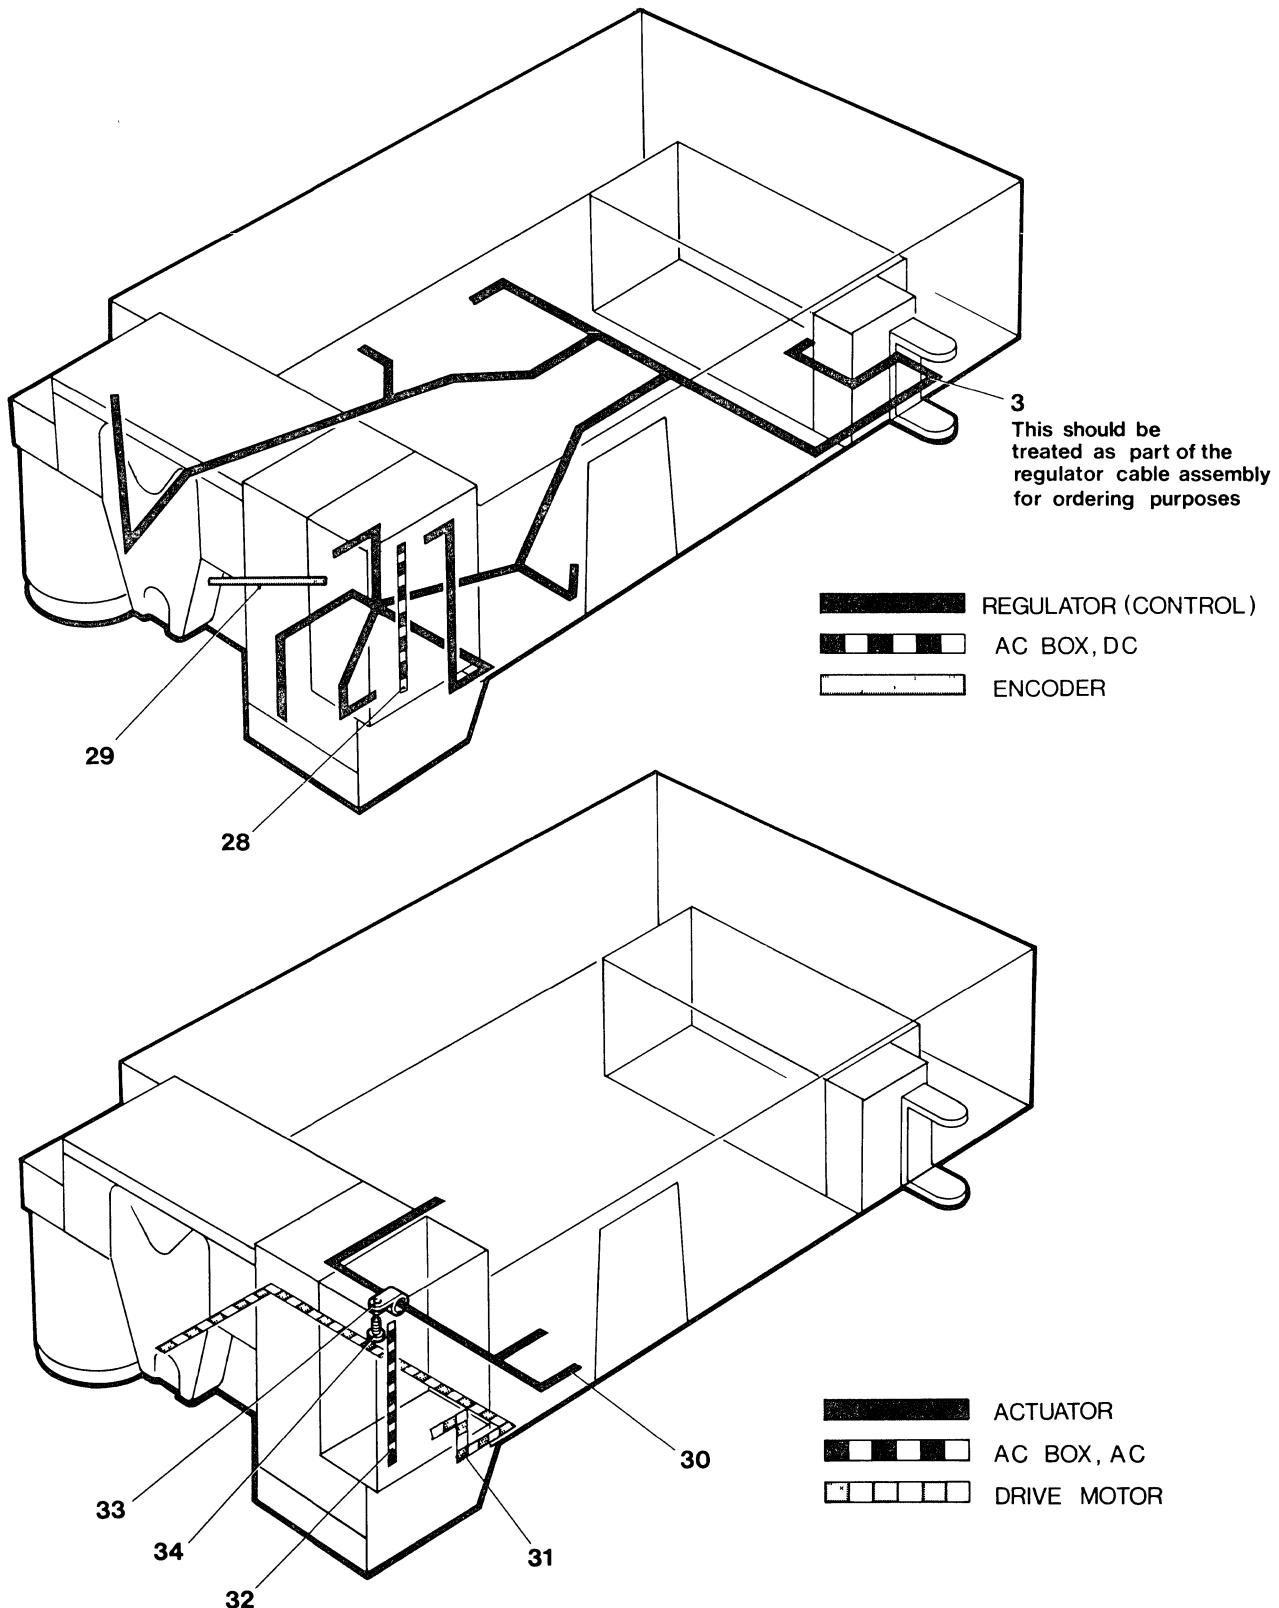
CABLE ASSEMBLIES (PART 2 OF 2)
